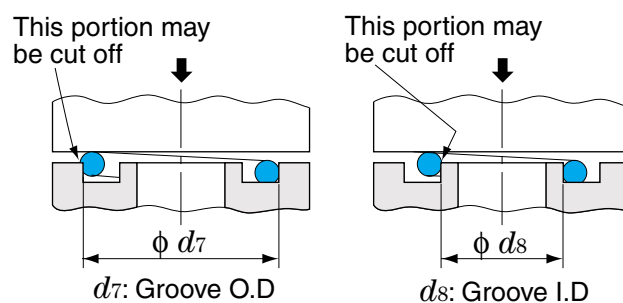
Fitting groove for static sealing of flat surface
